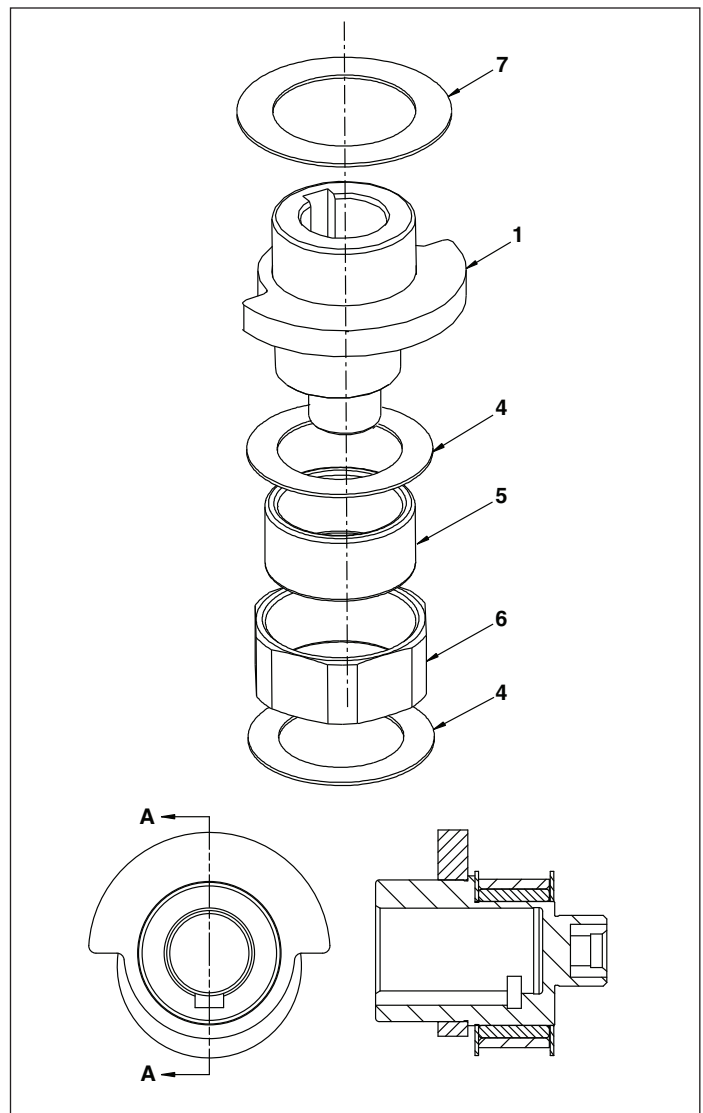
B, Eccentric Assembly for Direct Drive Motor (Replaces original eccentric assembly - ZE, ZG and ZW Series - Date Codes A, B and C)
